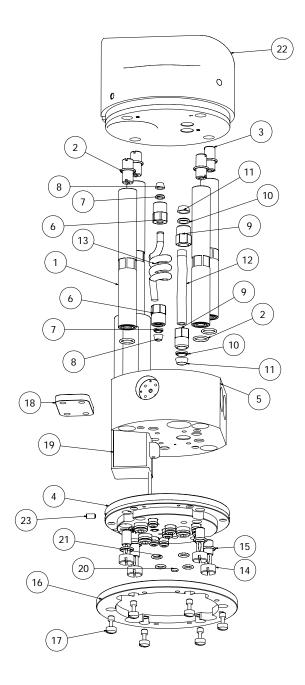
Mounting Block, Shroud Halves, and Retaining Ring Removal
